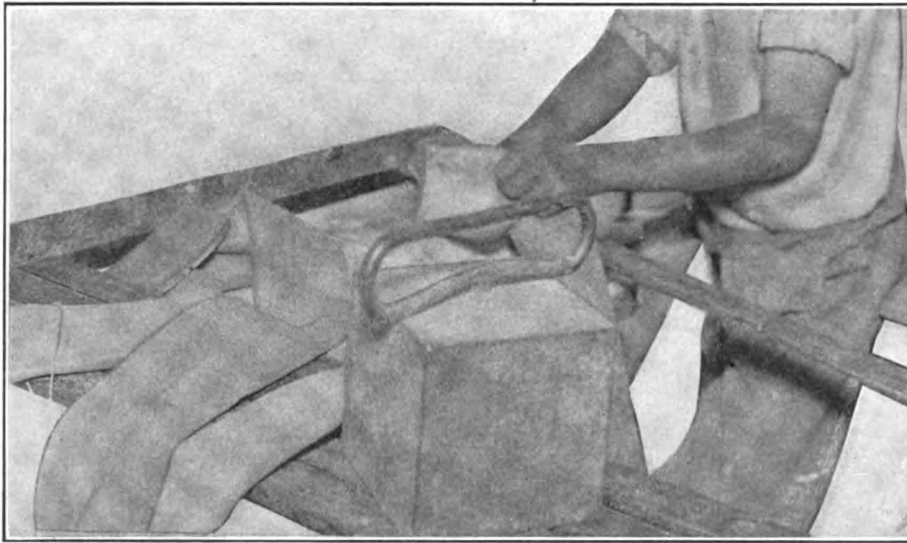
Inner Tube with Patching Completed Inspected and Ready to Go Into Vulcanizer
